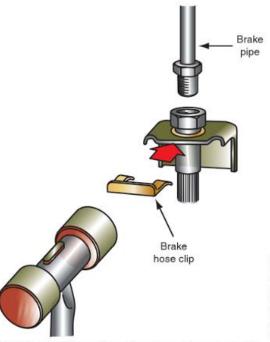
The locking clip is tapped into place with a small hammer.
